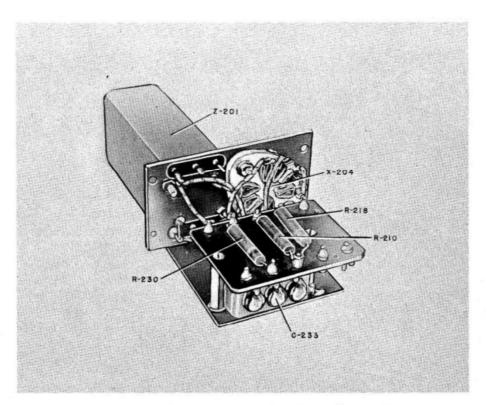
Receiver 1st I-F Assembly - Bottom View
